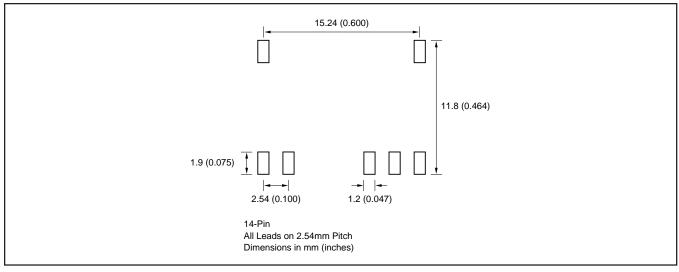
PCB Pad Size and Placement for "U" Package.
